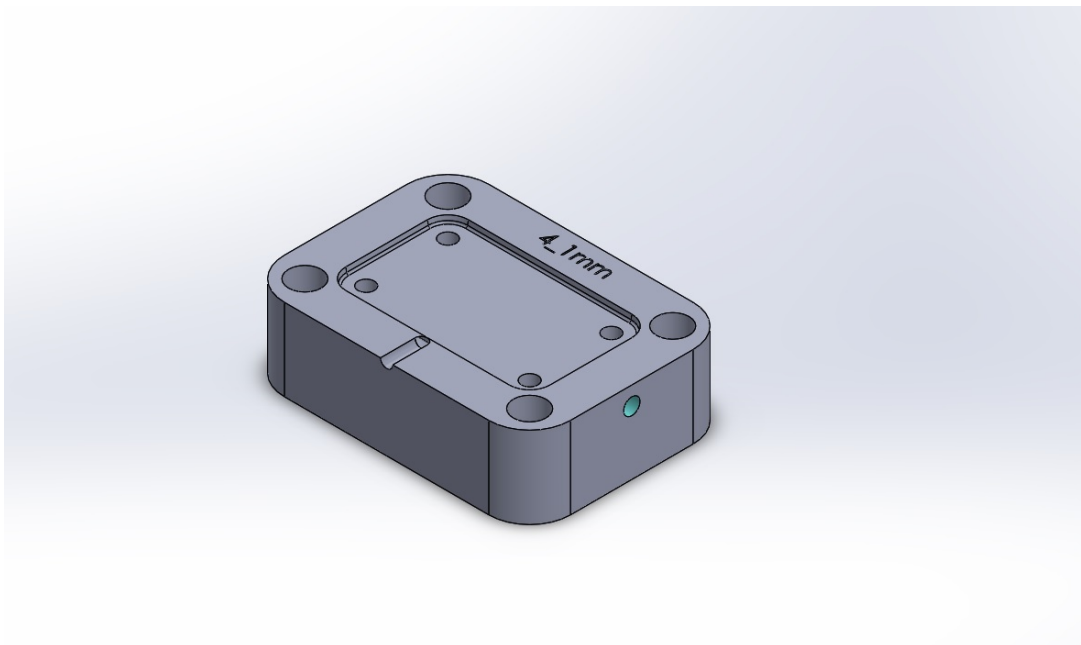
CAD design of the IM trial insert with 4 mm channel.
